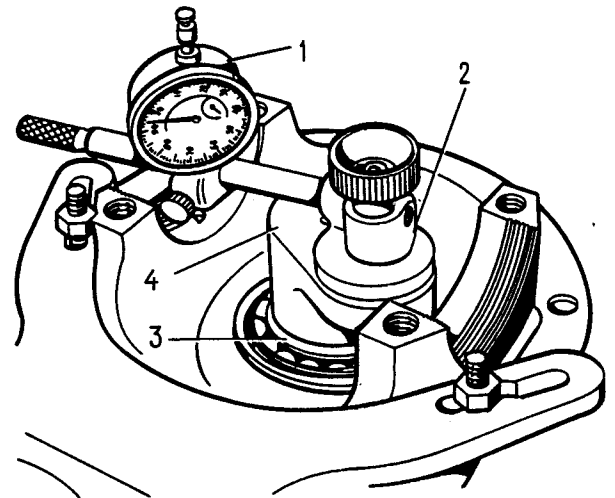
Determining Thickness of Drive Pinion Adjusting Ring:
